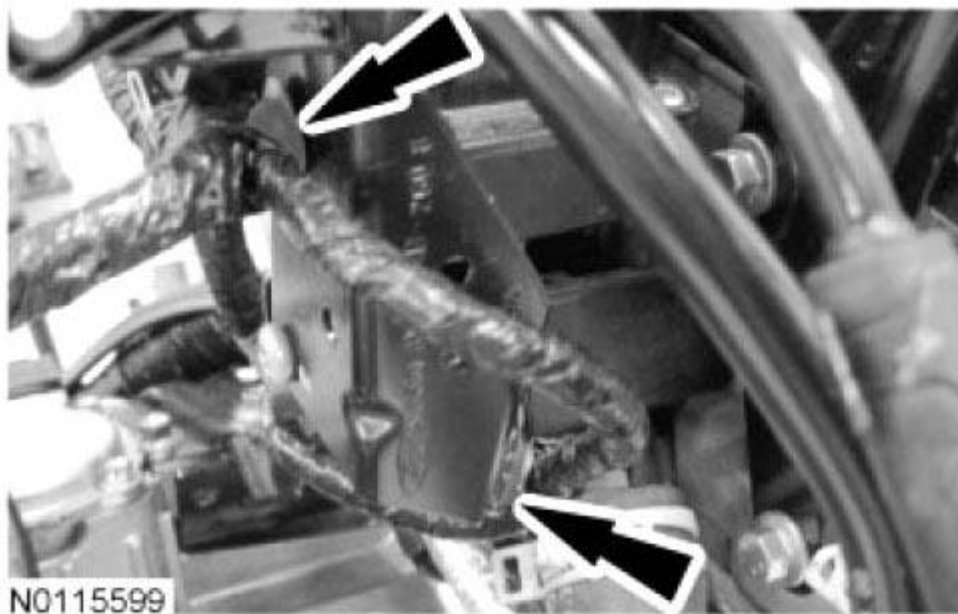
Locating Wiring Harness Retainers From Coolant Outlet Bracket
